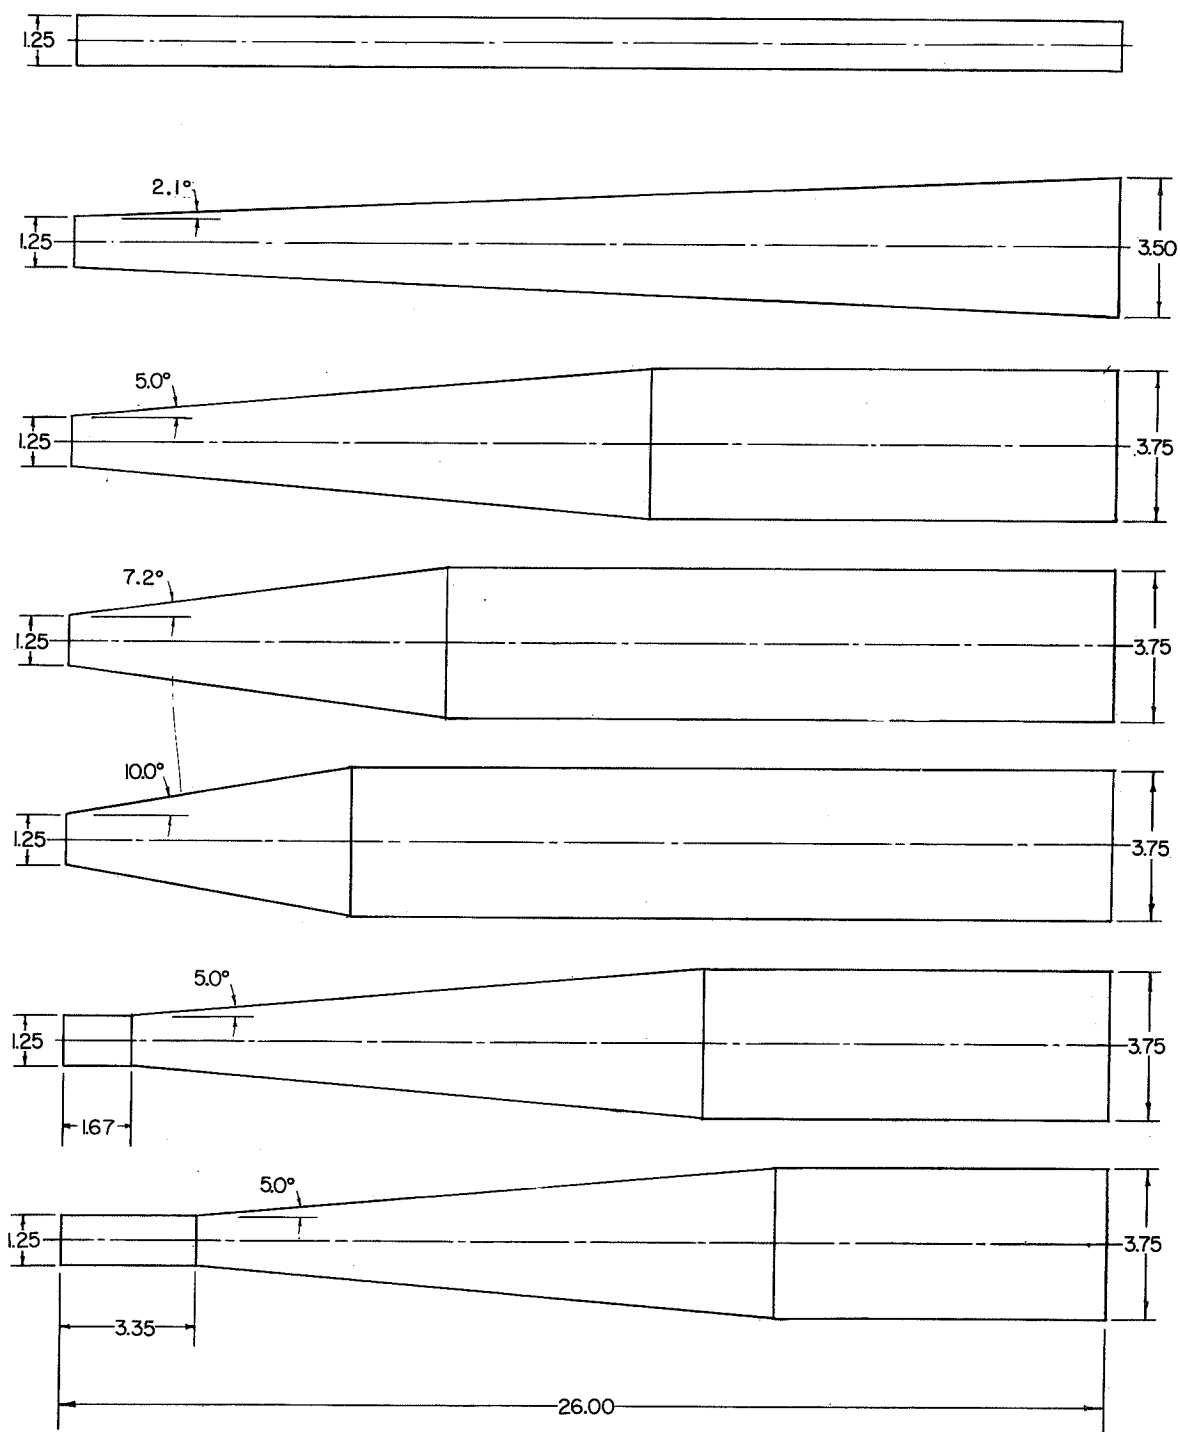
Sting shapes investigated. All dimensions are in inches.
